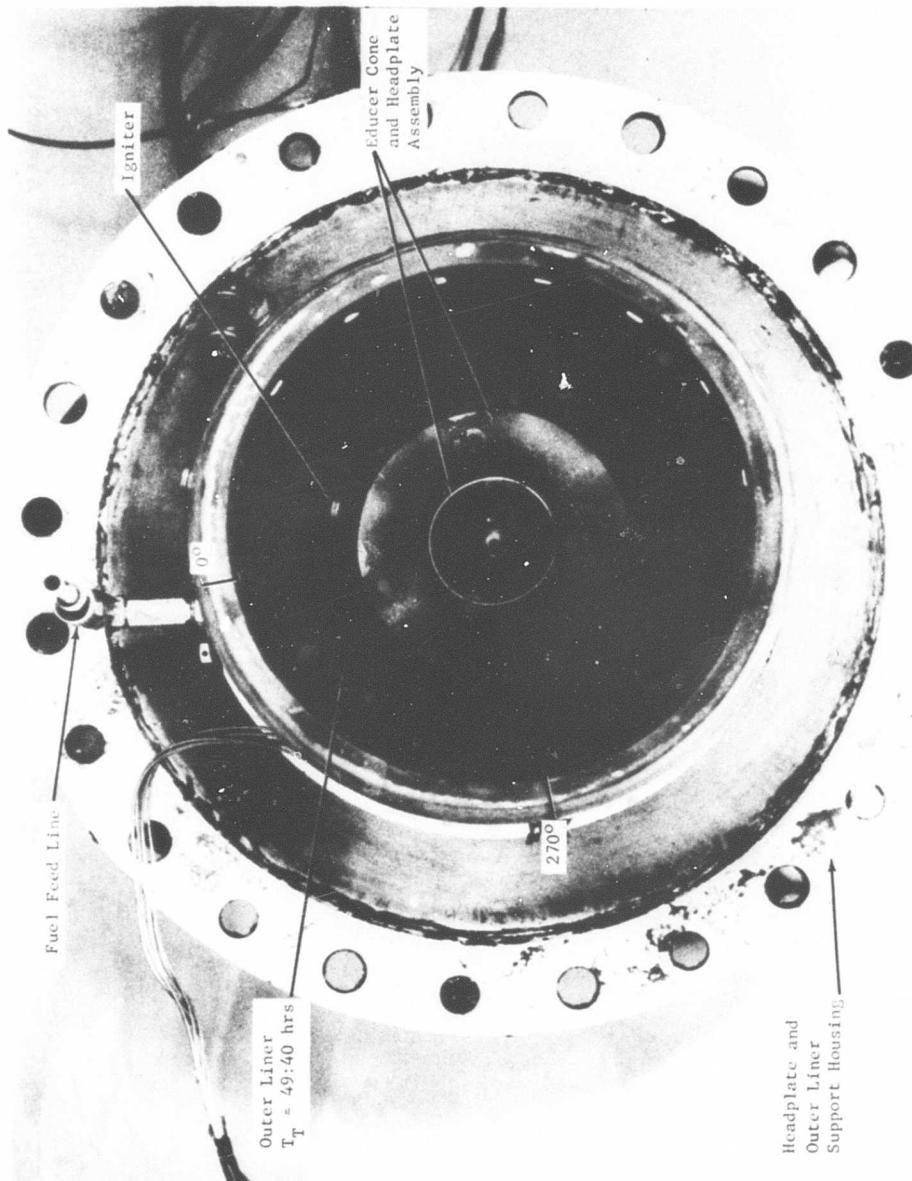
Post-Test Photograph of Atomizer-Educer Headplate Assembly After 12:05 Hours of Hot Testing.
